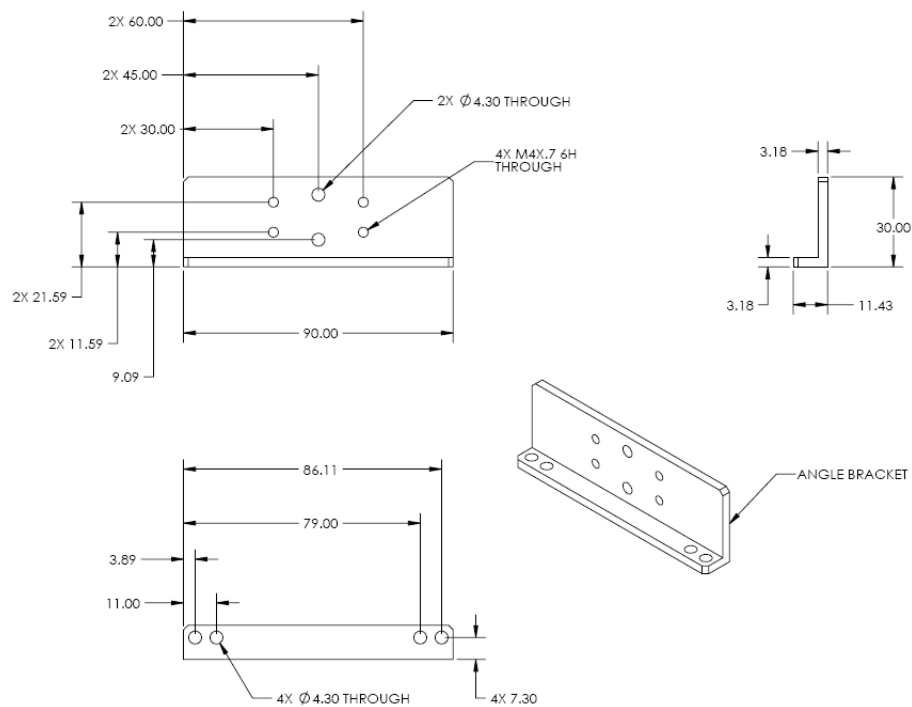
HG-CH Camera Head Mounting Hardware, Angle Bracket (in mm)
